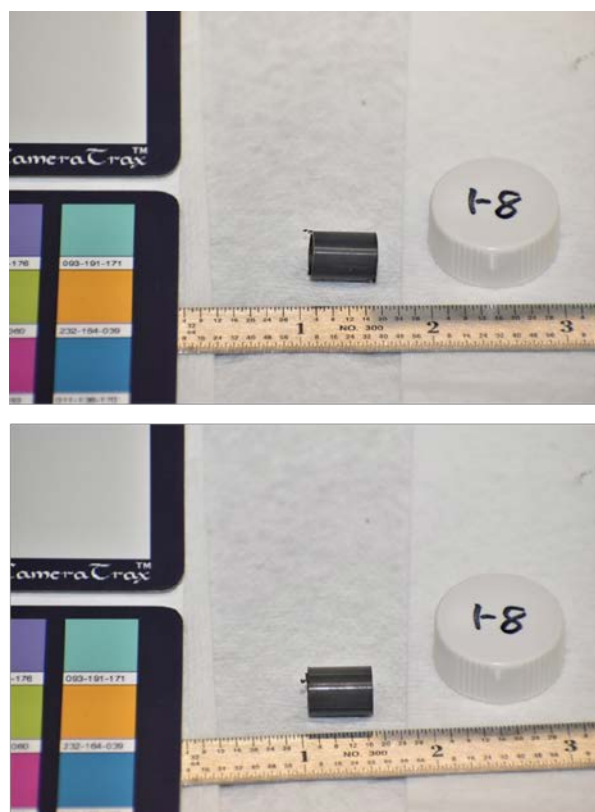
KP-1-8 Pre-Cut Sample Pictures
